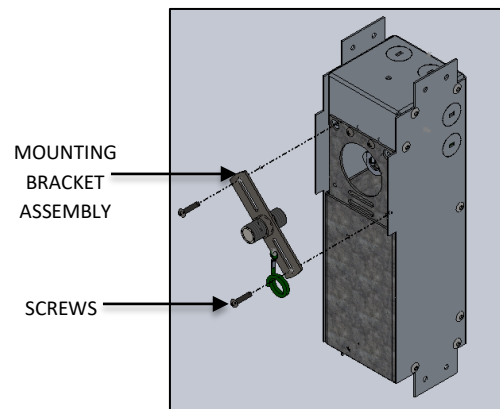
MOUNTING BRACKET DISASSEMBLY
